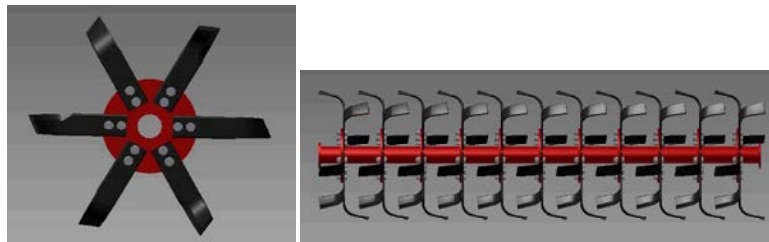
CAD Model for arrangement of blades on the rotor shaft
